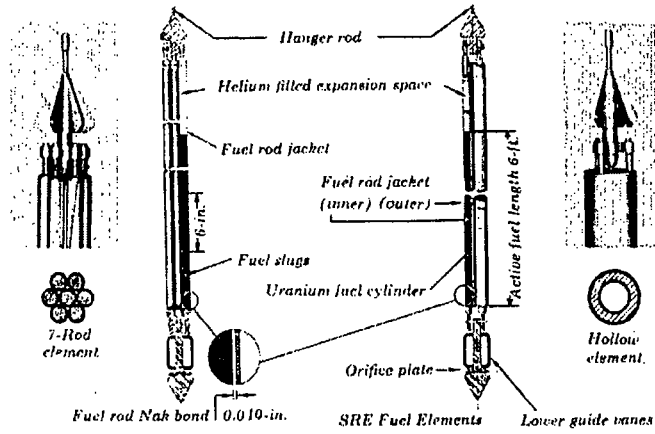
Detail of the 7-rod and hollow rod SRE fuel elements. (SRE Photo 30)
